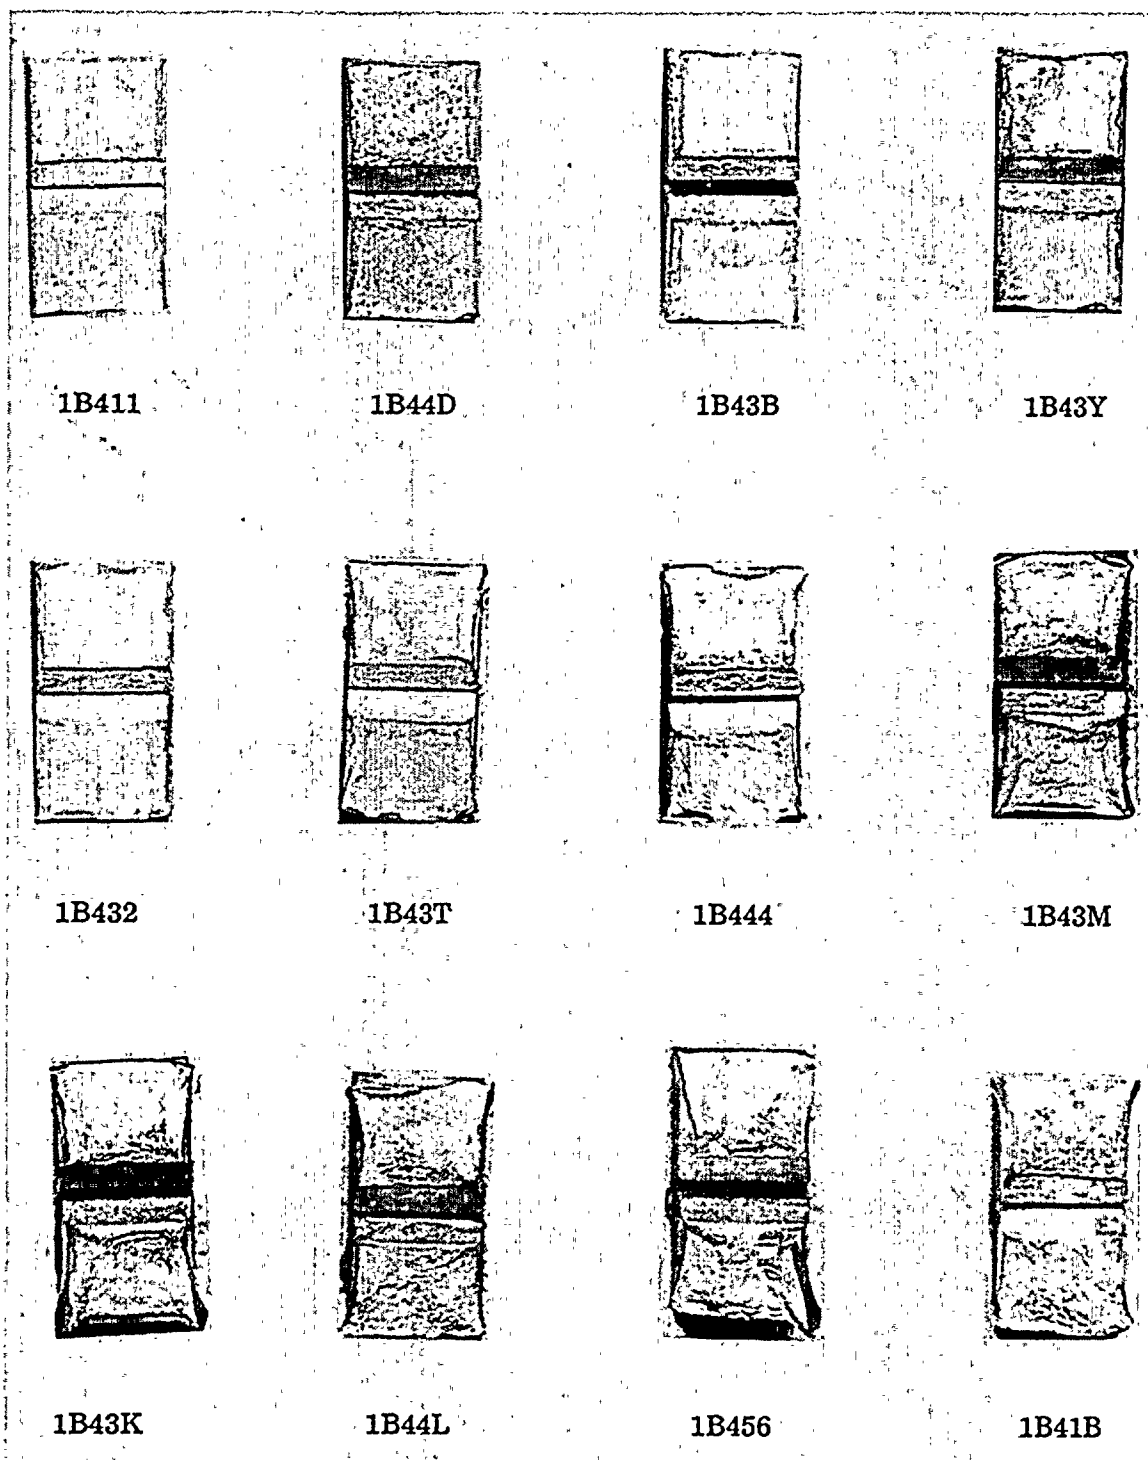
Charpy Impact Specimen Fracture Surfaces for Palo Verde Unit 2 Reactor Vessel Heat-Affected-Zone Metal
